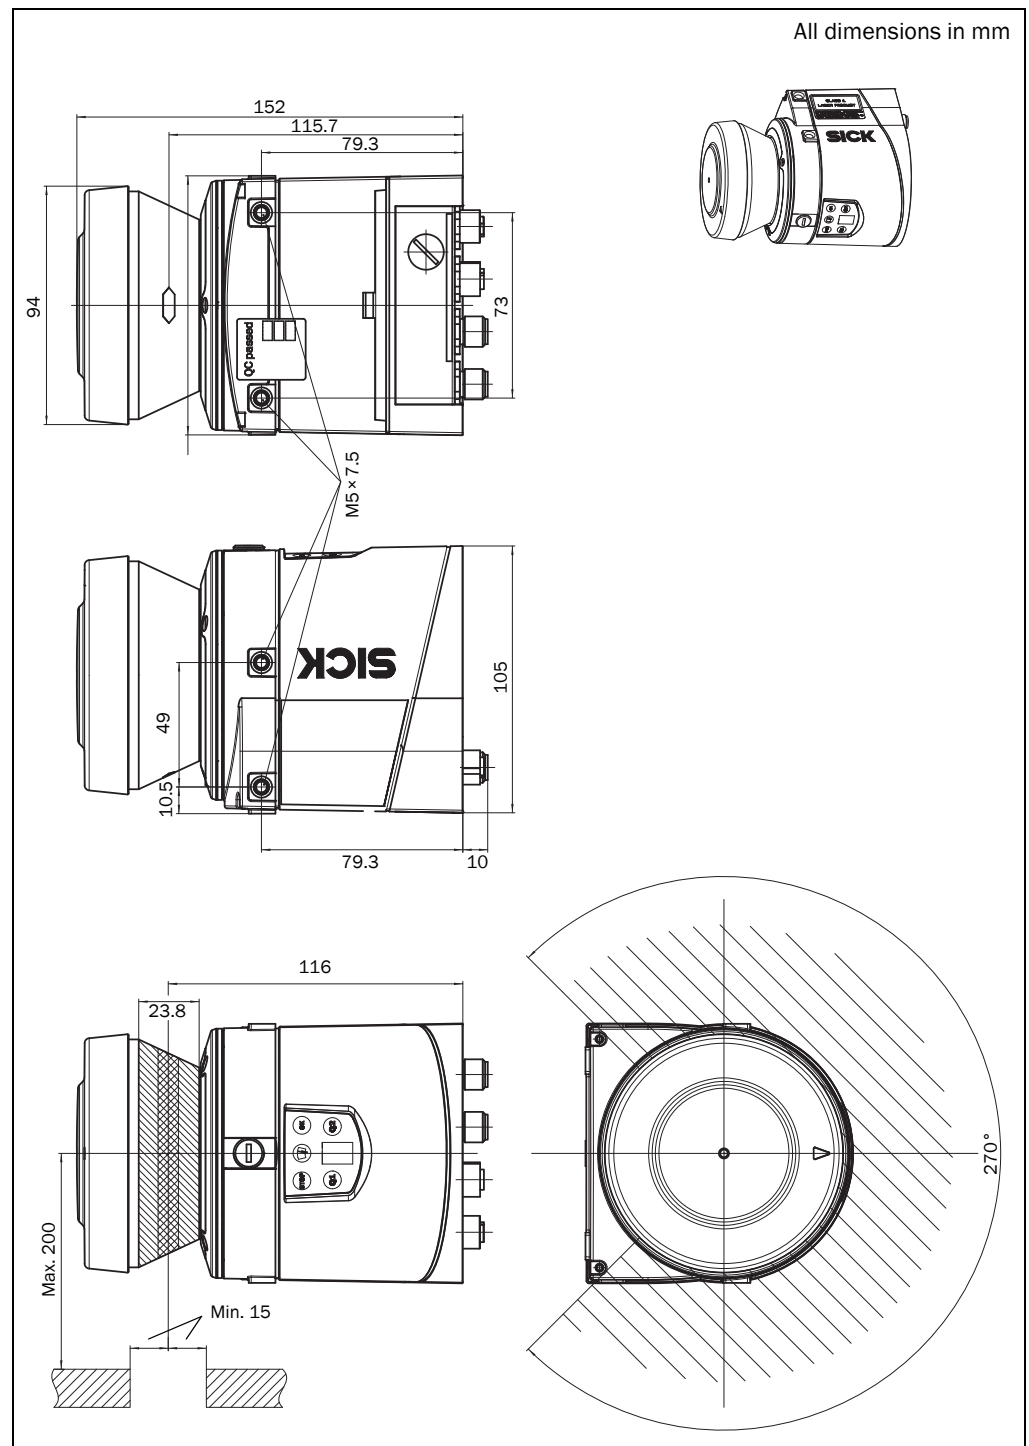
Dimensional drawing LMS13x/LMS14x Security and LMC13x VdS
